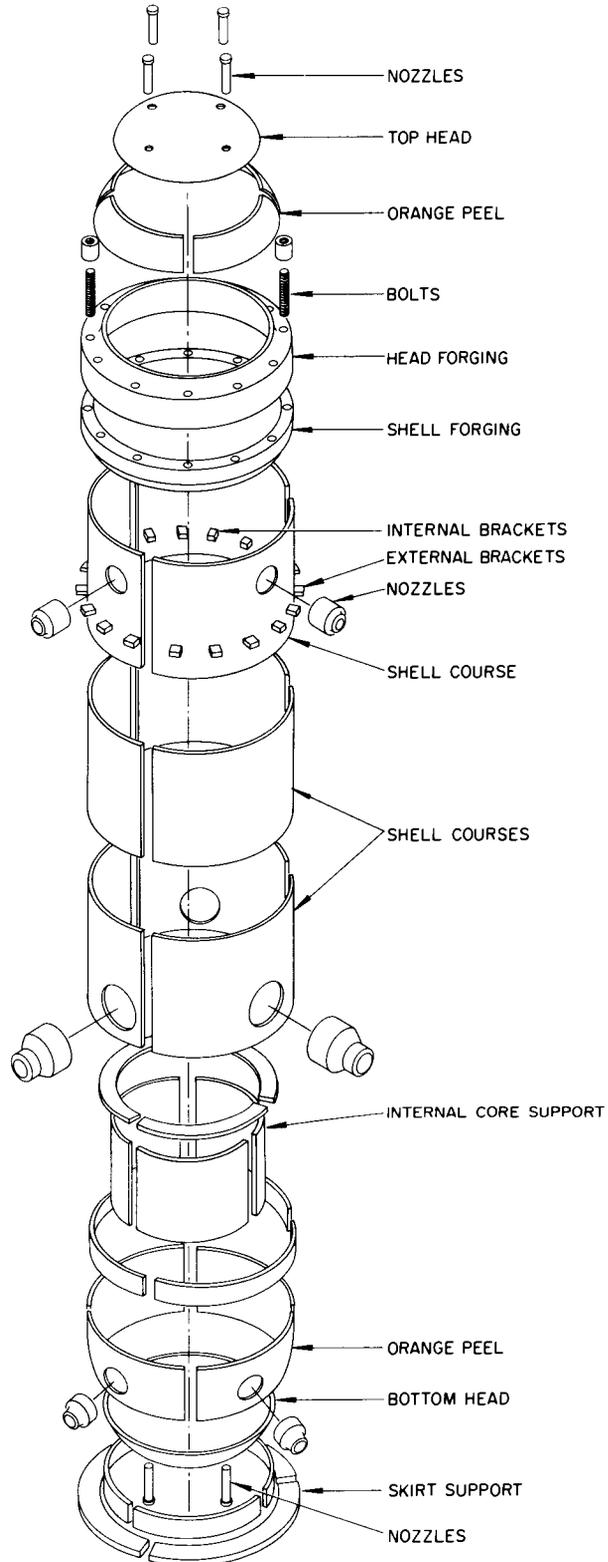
Exploded schematic view of a typical large pressure vessel.
